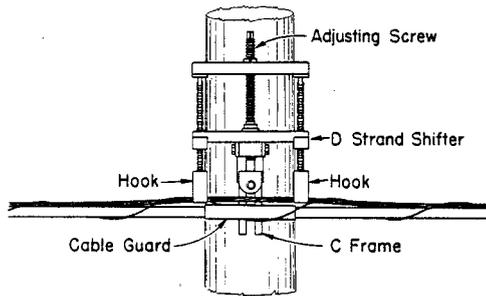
D Strand Shifter Installed on C Cable Block Frame
